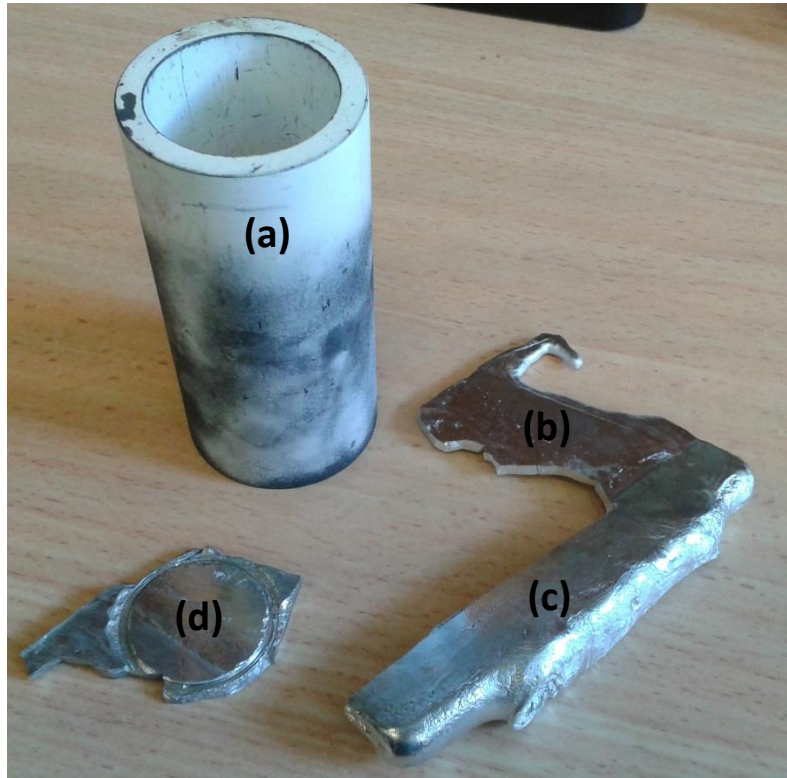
(a) Crucible for induction furnace melting of alloys, (b) cracked amorphous plate, (c) riser cut free from main casting, and (d) drilled and partly shaped target.
